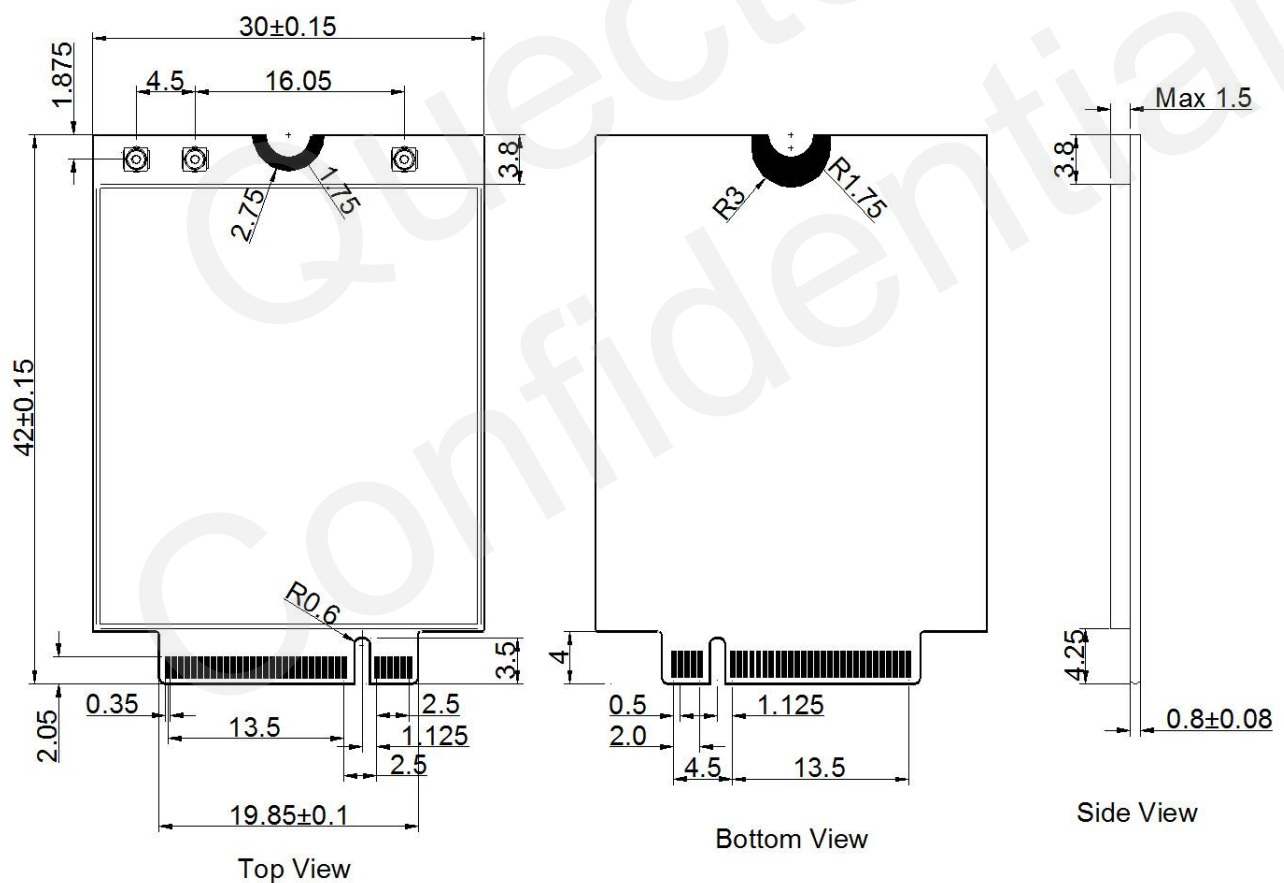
Mechanical Dimensions of EM05 (Unit: mm)
